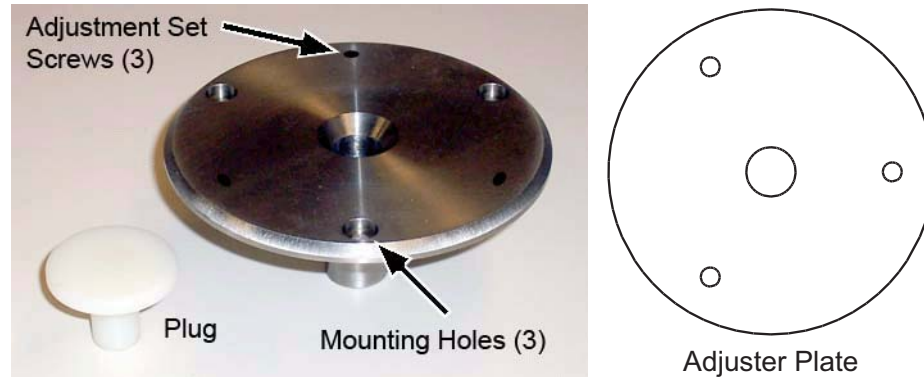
Receptor Bracket & Plug and Adjuster Plate
